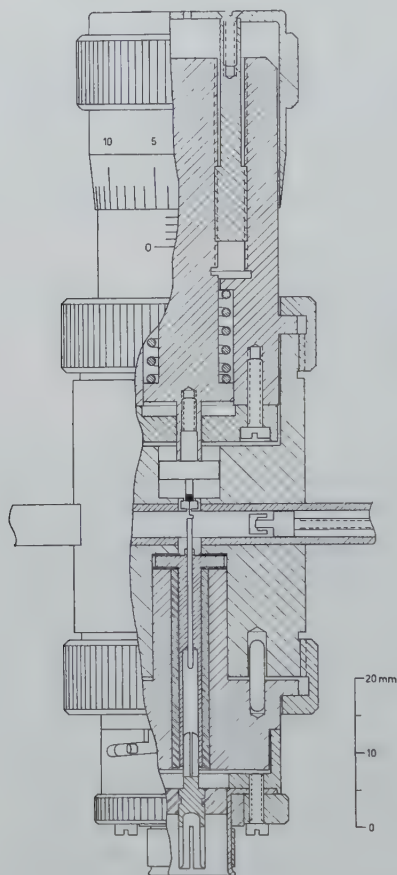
Cross-section of the millimeter wave harmonic multiplier. The millimeter waveguide is perpendicular to the page. Insulating materials are indicated by shading with double lines.
